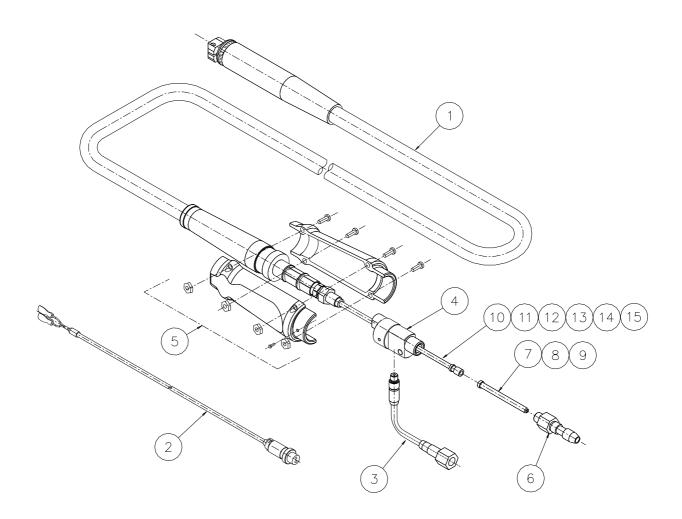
Exploded diagram for the coaxial power cable (For A type, V type manipulator)
